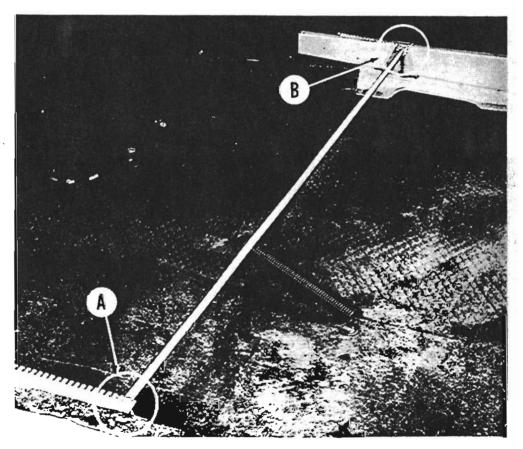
Locate the Cross Rod Gear Teeth in Corresponding Holes in the Gear Racks.
